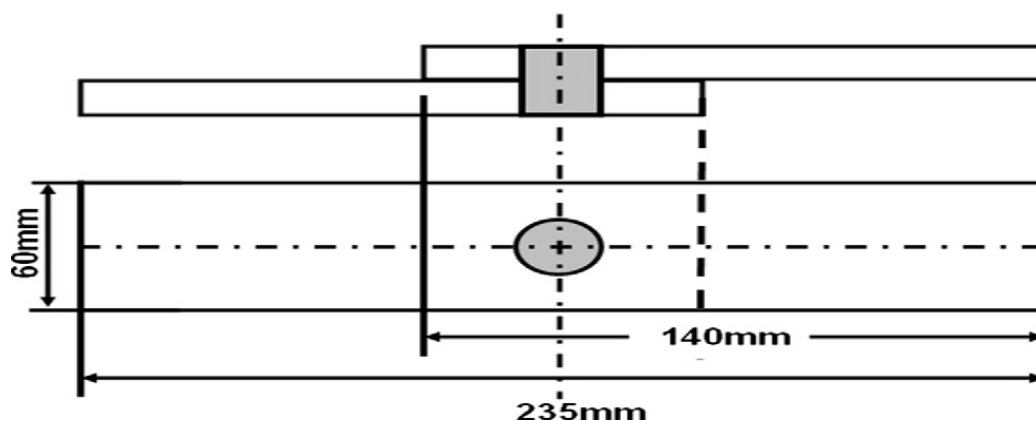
Tensile-shear test sample dimensions (mm)[24]
